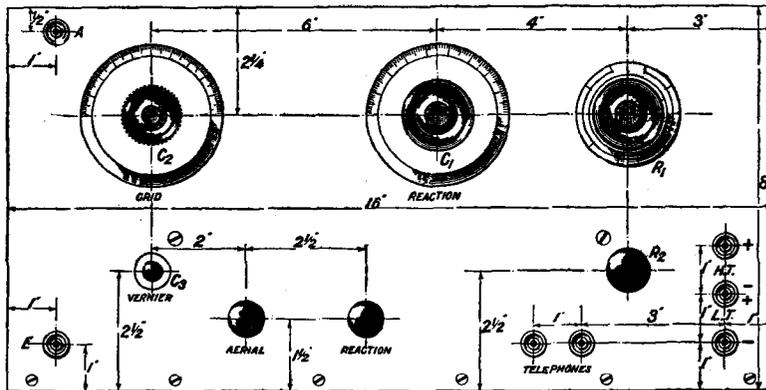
Drilling dimensions for mounting the components may be taken from this drawing of the front of the panel.
